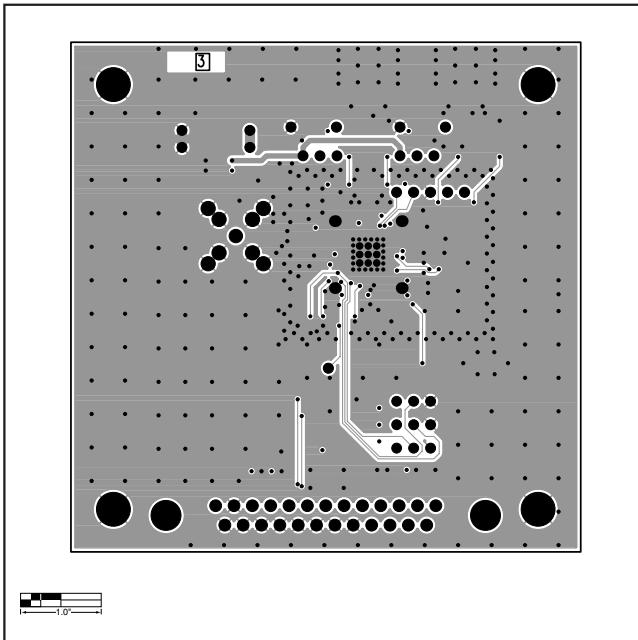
MAX355/MAX357 EV Kit PC Board Layout—Inner Layer 3
